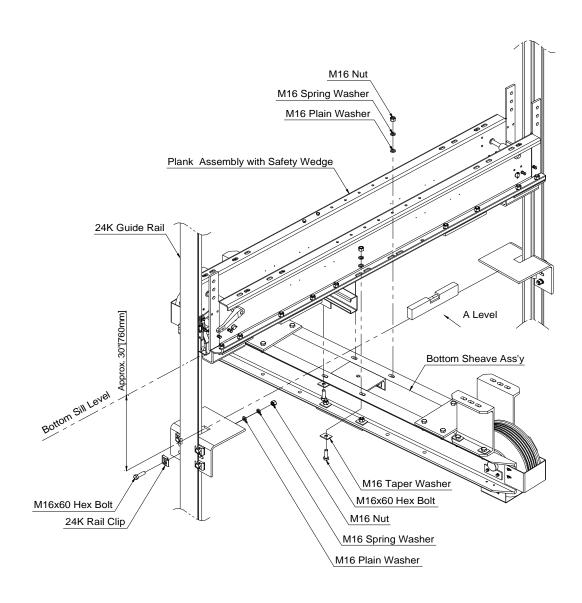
A. PLANK and BOTTOM SHEAVE ASSEMBLY INSTALLATION (Underslung Corner post type)
